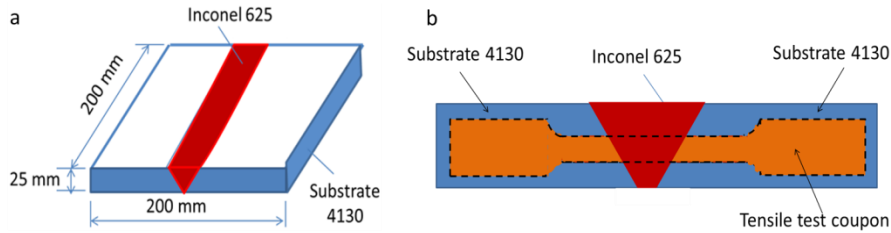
Schematic drawing of (a) the clad sample and (b) front view of sectioning the transverse tensile test coupons
